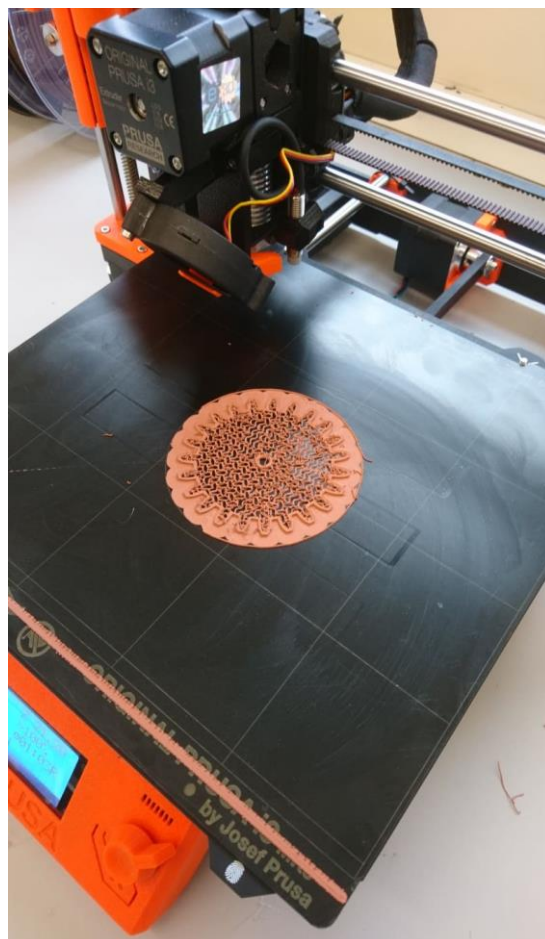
Printing by FDMet a copper helicoidal gear with 20% infill
